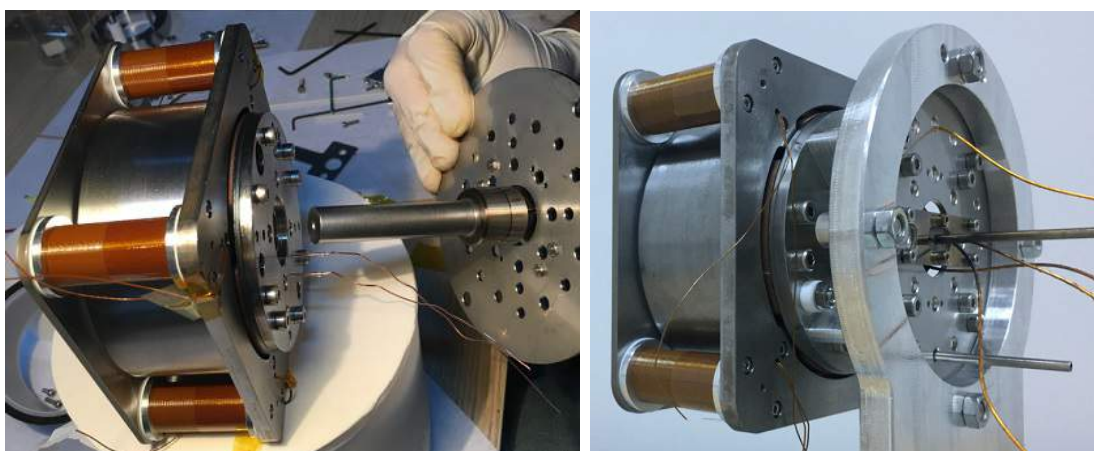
a) Mounting of support backplate and cathode, b) Cabling of Hall thruster
